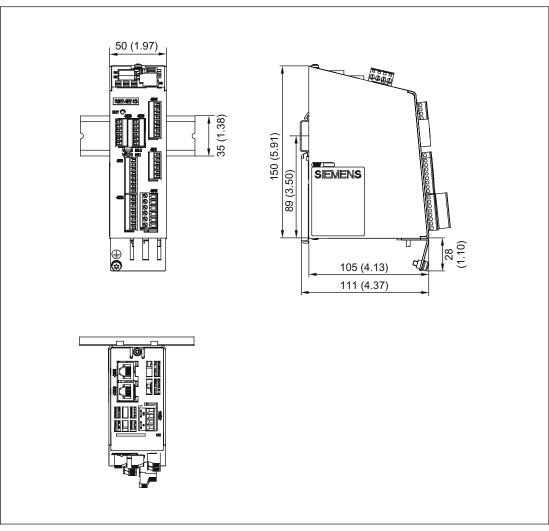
Dimension drawing TM31, order number: 6SL3055-0AA00-3AA0
